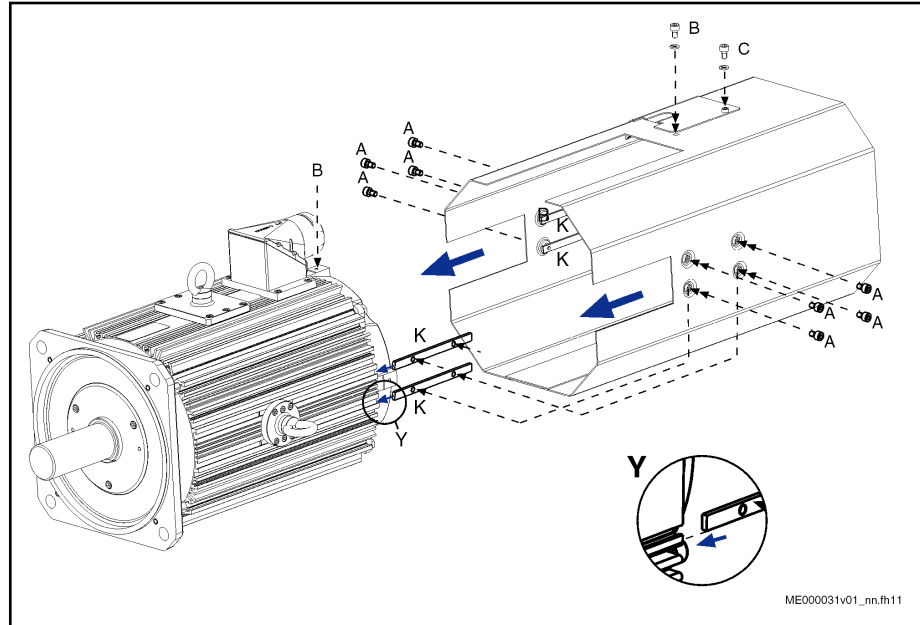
Assembly Fan Unit Axial, Flange Dimension 260
